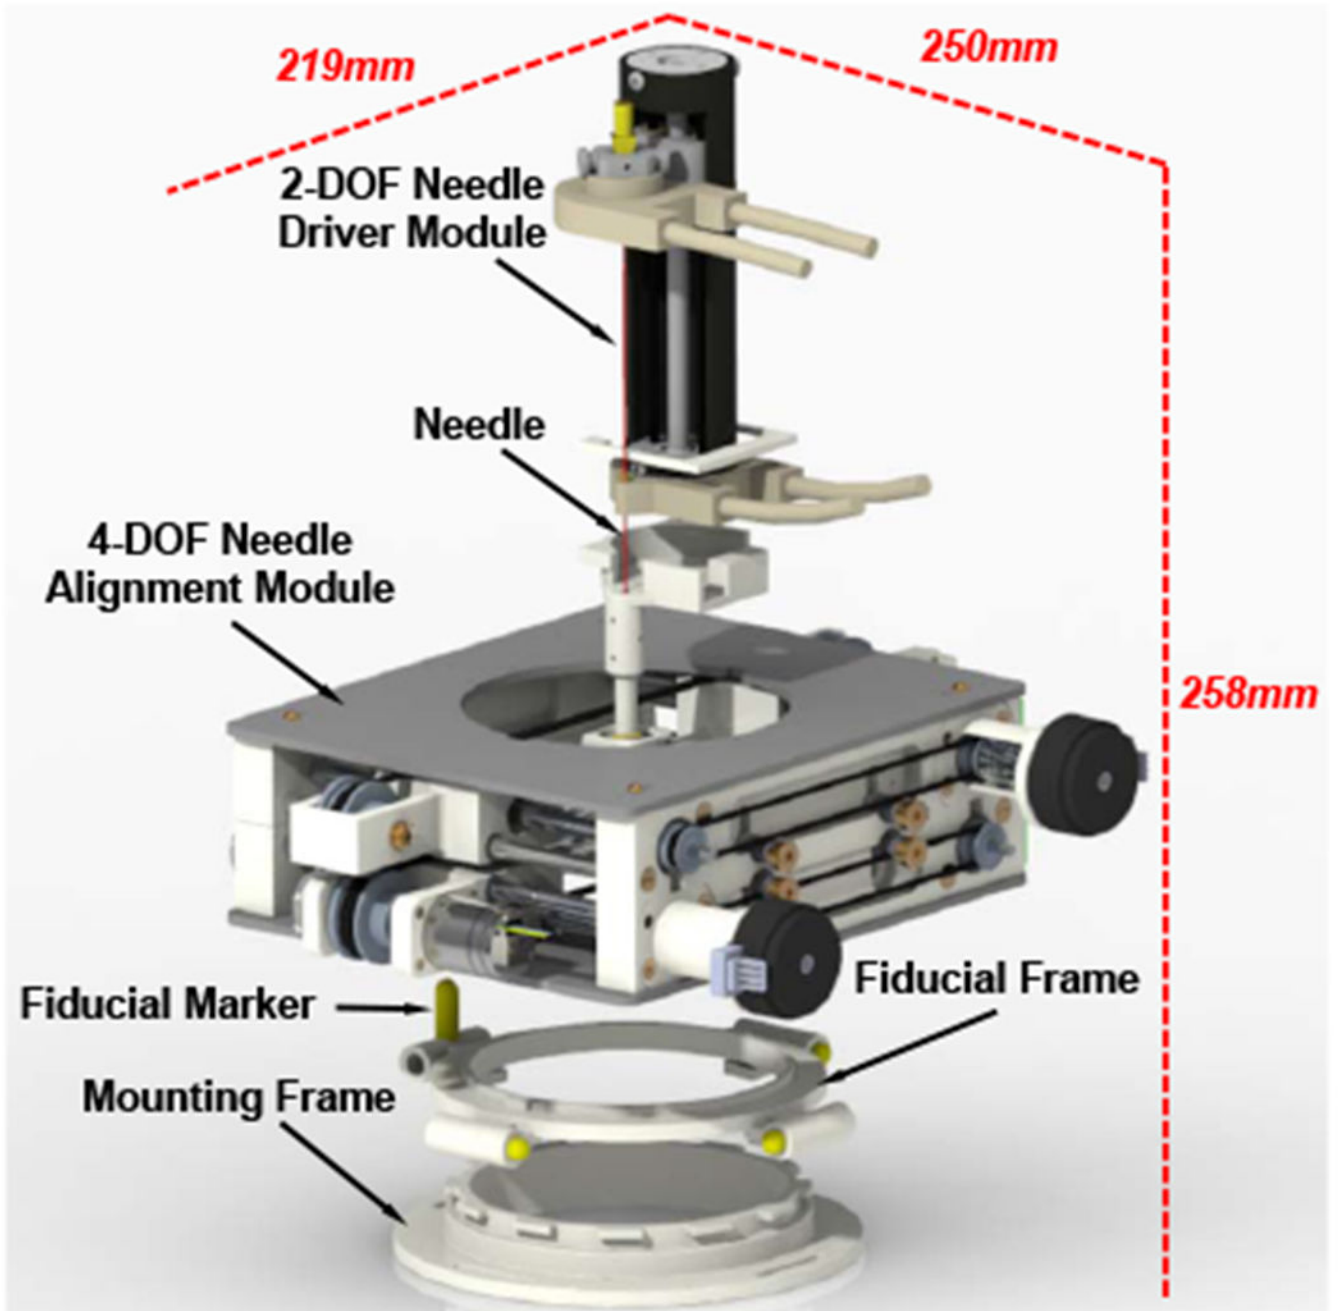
Exploded CAD model of the 6-DOF body-mounted pain injection robot, showing the major modules and its overall dimension at the home position.
